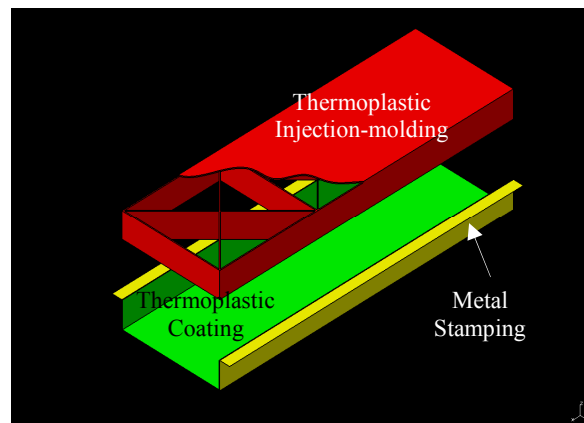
A Simplified Prototypical BIW Load-bearing Components Manufactured Using the Metal Over-molding PMH Technology
